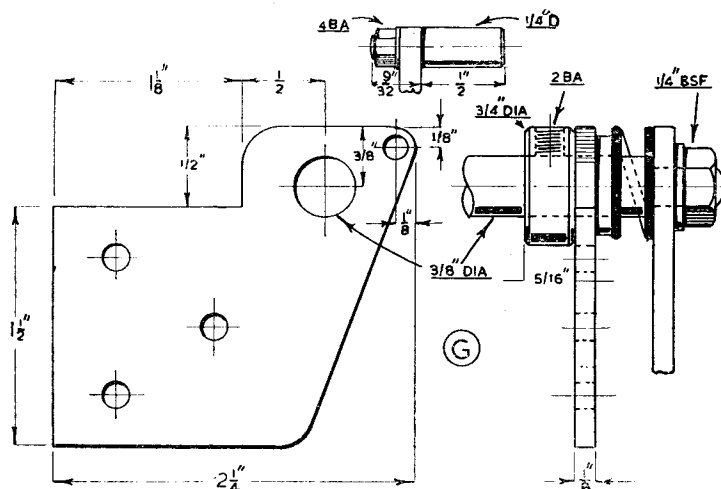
Showing the right-hand hinge bracket; also, details of the frame-stop and friction joint
